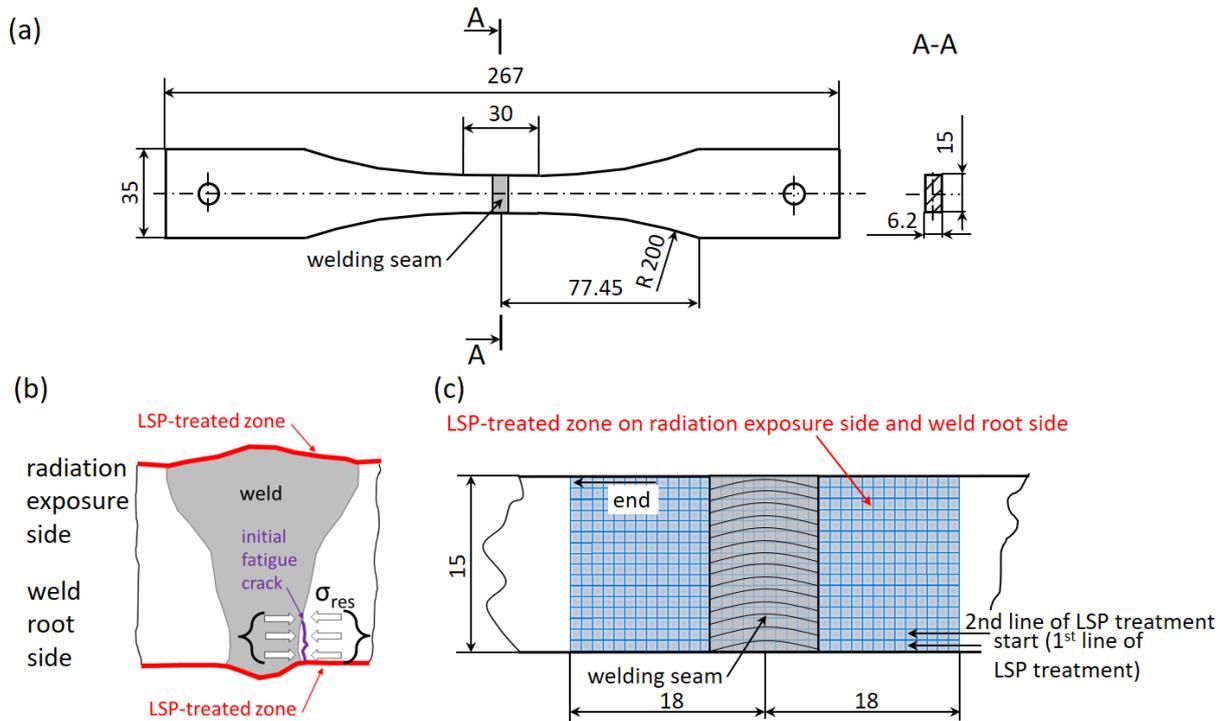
(a) Geometry of the specimen with the weld in the middle for the fatigue test: (b) sketch of the weld with introduced fatigue crack and (c) schematic view of the LSP-treated region of the specimen for the fatigue test. All dimensions are in mm.
